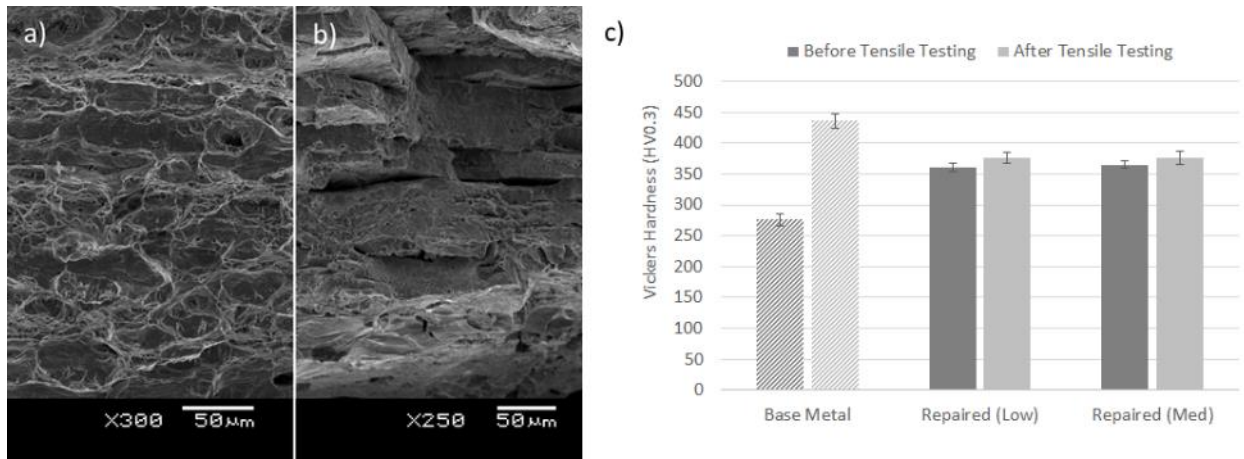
SEM image of a) base metal fracture surface, b) deposition fracture surface with step facets, and c) microhardness measurements and standard error of base metal and deposition in repaired specimens within 300  $\mu\text{m}$  of the fracture interface before and after tensile testing
